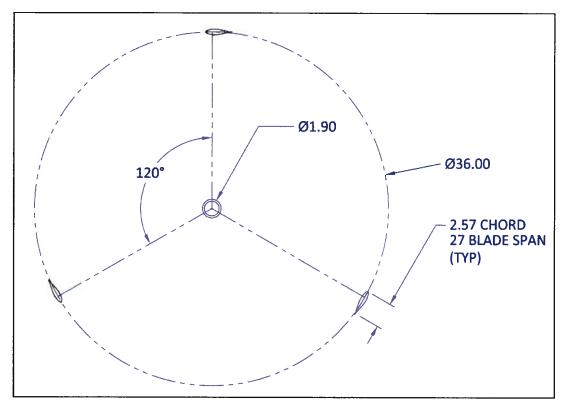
Turbine rotor nomenclature (top view, inches).
